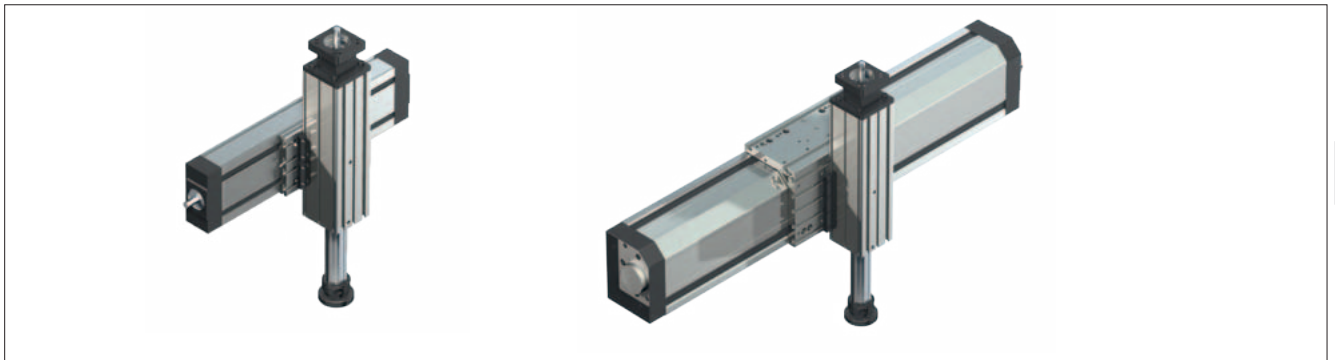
Mounting the Feed Module to a Compact Module or a Bridge Module
